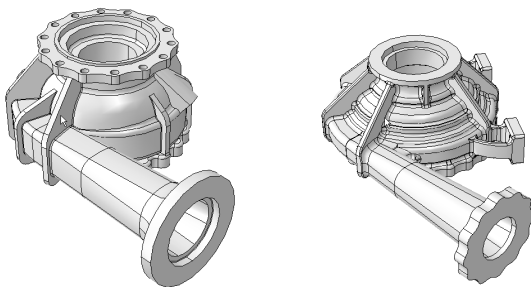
Designed shape of volute casing for oxidizer pump(left) and fuel pump(right)
